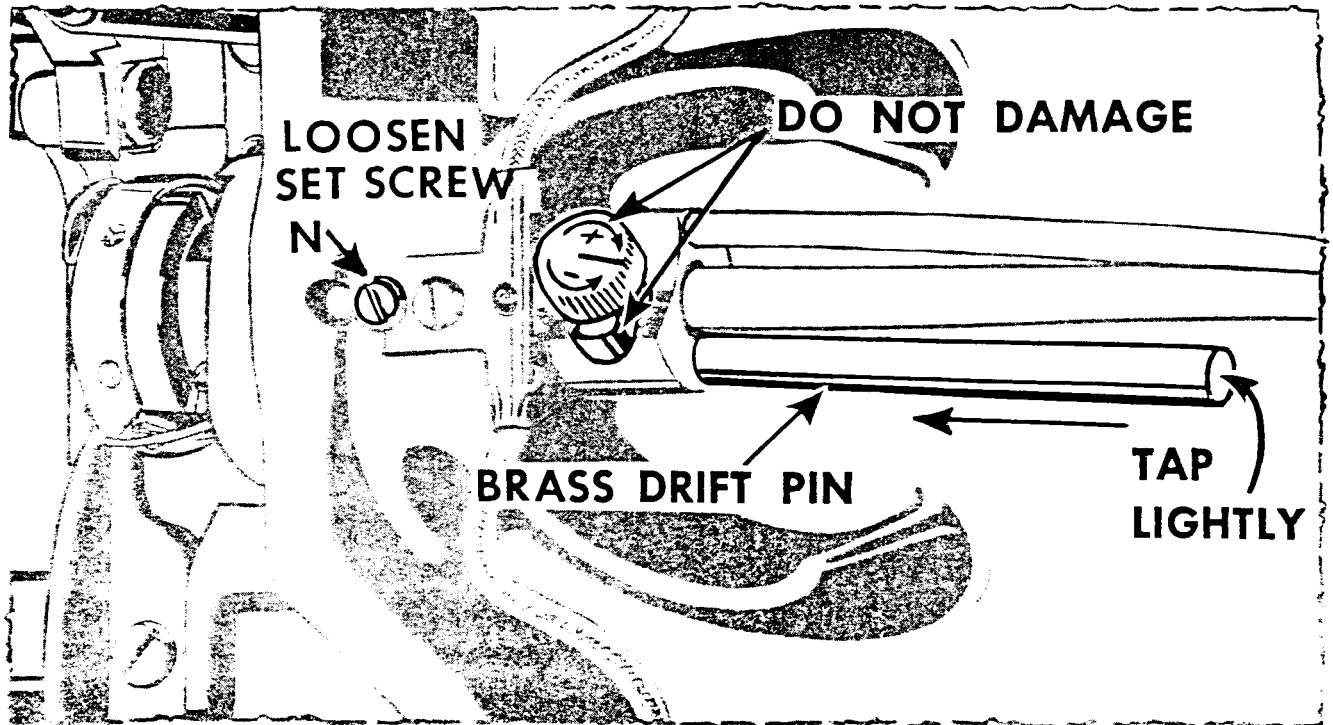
Moving Sewing Hook Assembly Toward the Needle
